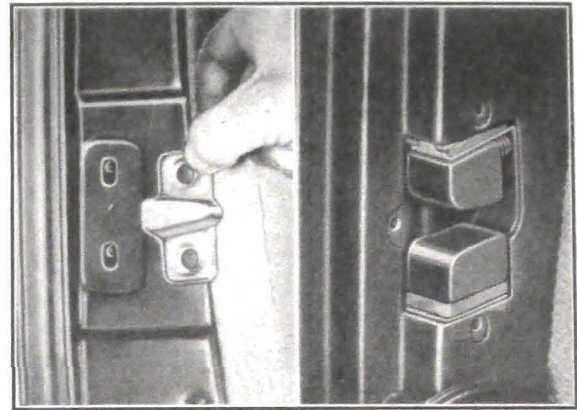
Adjustable Wedge Plate Dovetail Bumper Assembly
